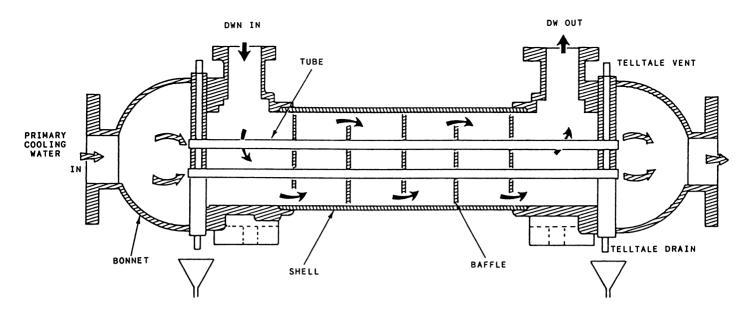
Single-pass SW/DW heat exchanger with double tube sheets.
